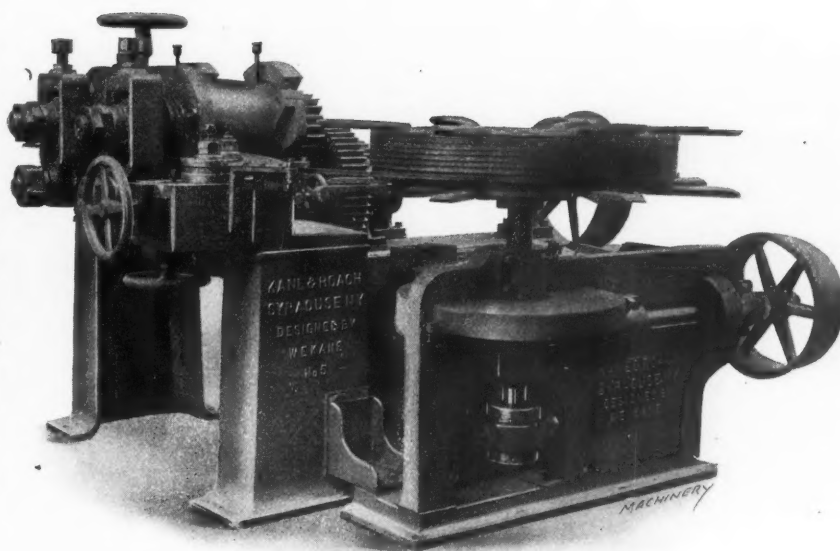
Kane & Roach Straightening, Sizing and Reeling Machine
